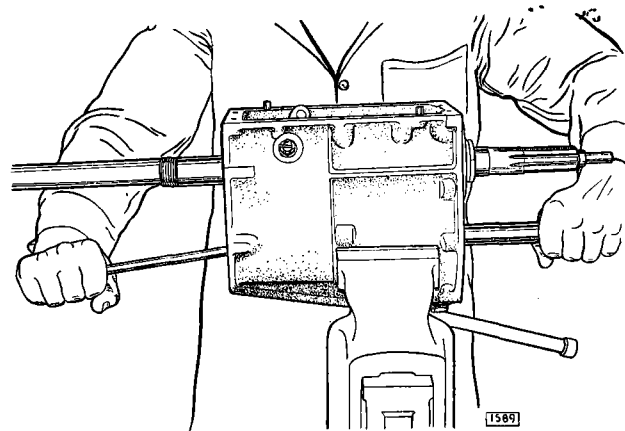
Lifting the layshaft into mesh and inserting dummy countershaft.
